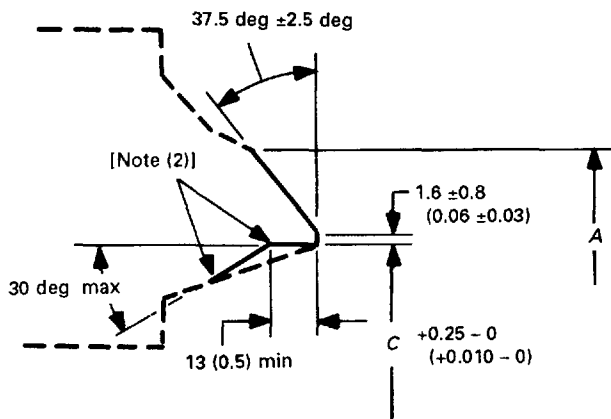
MAXIMUM ENVELOPE FOR WELDING END TRANSITIONS
